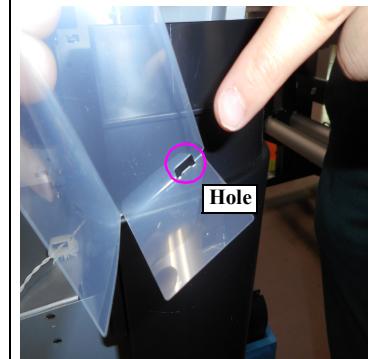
Removing the CUTTER MOTOR ASSY (2)
